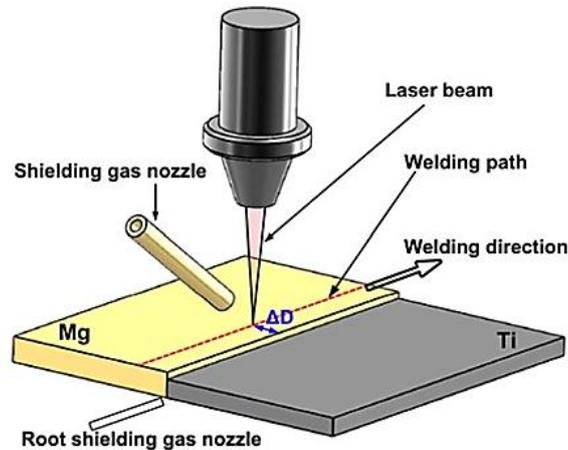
Illustration of fiber keyhole laser welding experimental set-up (Gao *et al.* 2012)
